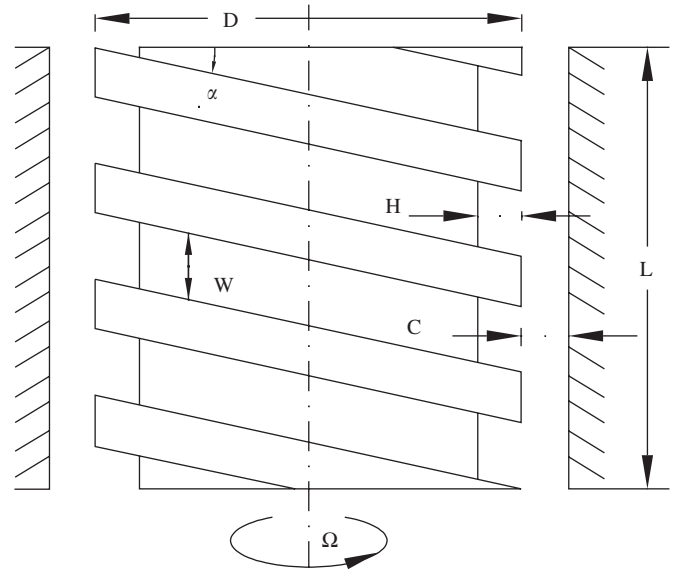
A schematic drawing of the pump. D : rotor diameter, L : rotor length, C : clearance, α : spiral angle, W : groove width, H : groove height, Ω : rotational speed.
